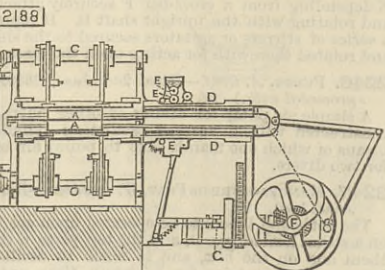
represents a side view of the indicating apparatus, and Fig. 2 a section through the hydraulic cylinder. A is a plunger block containing an annular bearing and fitted with longitudinal flanges B and rests on the bed-plate C, on which it will be free to move a short distance in a fore and aft direction as soon as the wedges D, that can be tightened by the screws E, are removed. Wrought iron bars F keep the plunger block from rising on its bed-plate. The fore-and-aft motion of the screw shaft and thrust block is
